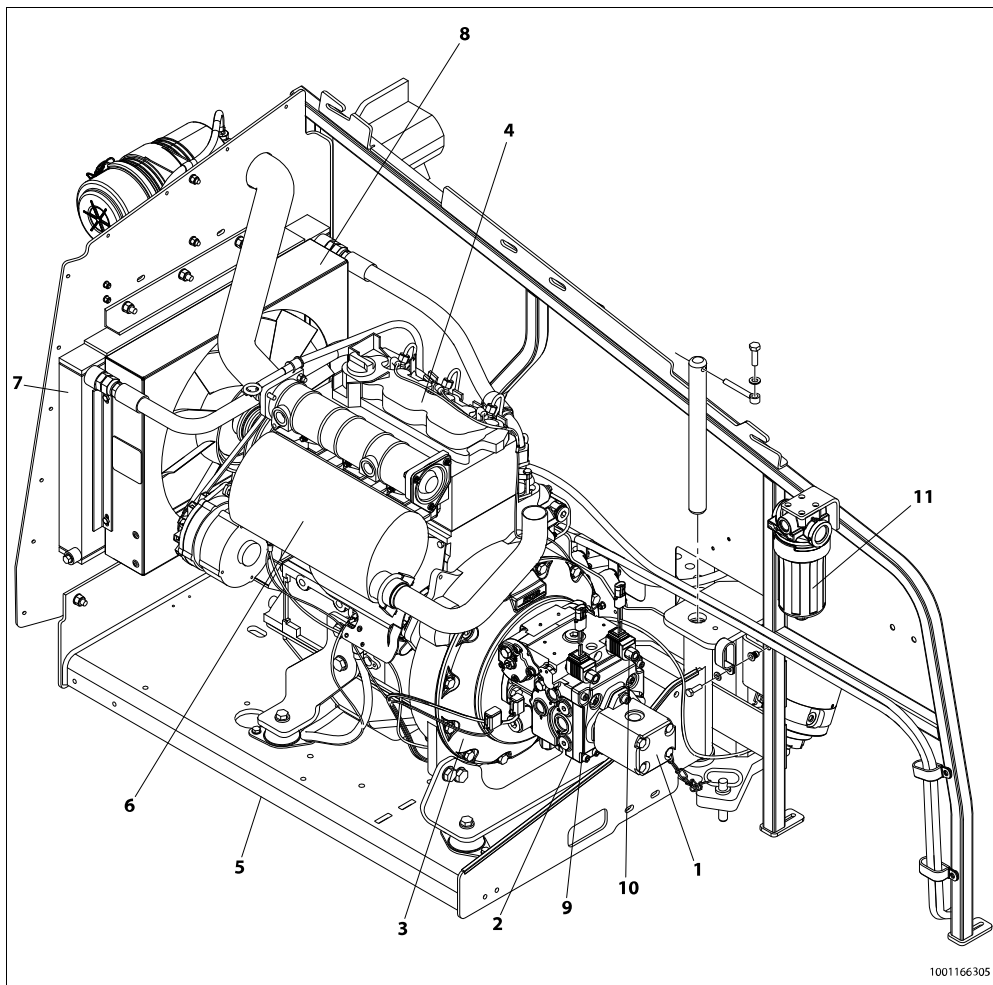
Deutz D2011L03 Engine Components - Sheet 1 of 3
